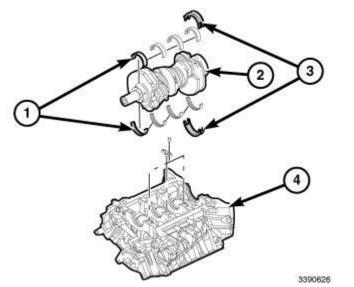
Crankshaft, Bearings, Thrust Bearing & Engine Block Courtesy of CHRYSLER GROUP, LLC
